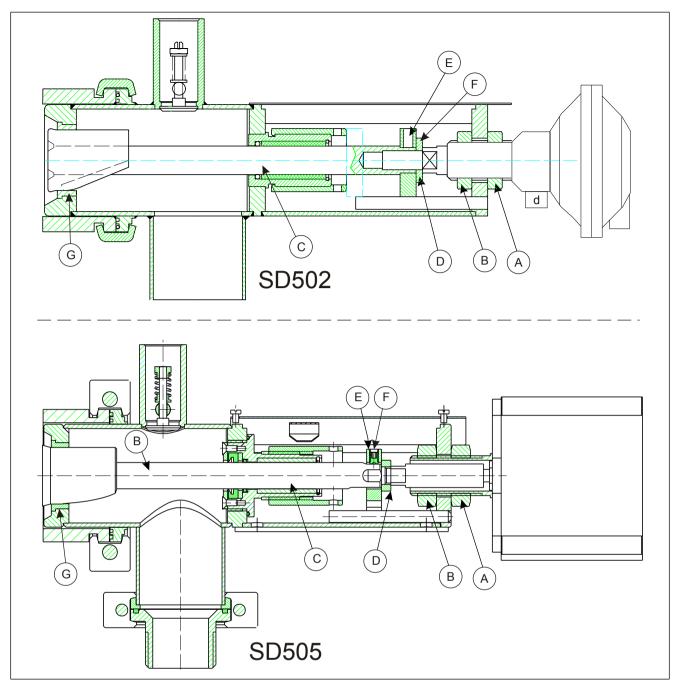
SD502/SD505: A & B - fastening nuts, C - piston shaft, D - support ring, E - retainer screw, F - piston rotation guard, G - seat ring.
